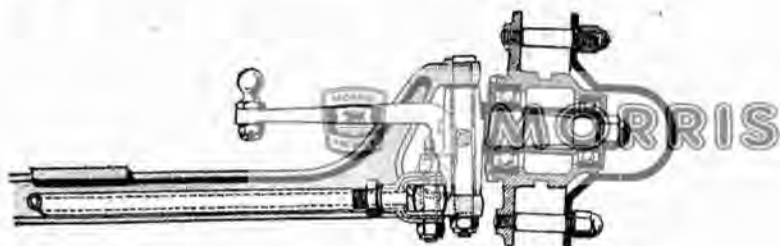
Designed especially for the heavier load, the front axle of the commercial vehicle is of stout construction.
